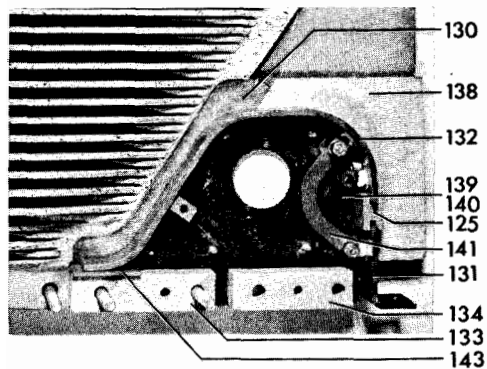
G Lower Runner Assembly (150 mva) '-4' & '-4S' Design
